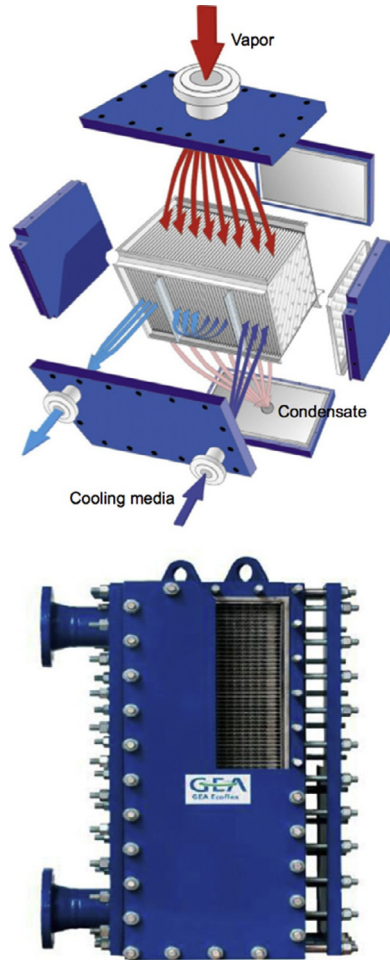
Welded “printed circuit” plate-and-frame design.
